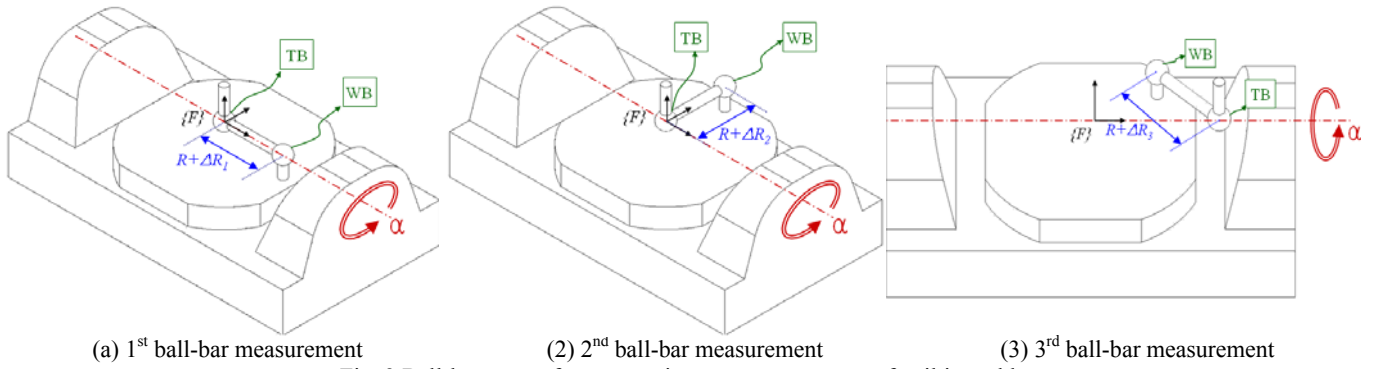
Ball-bar set-up for geometric error measurement of a tilting table
